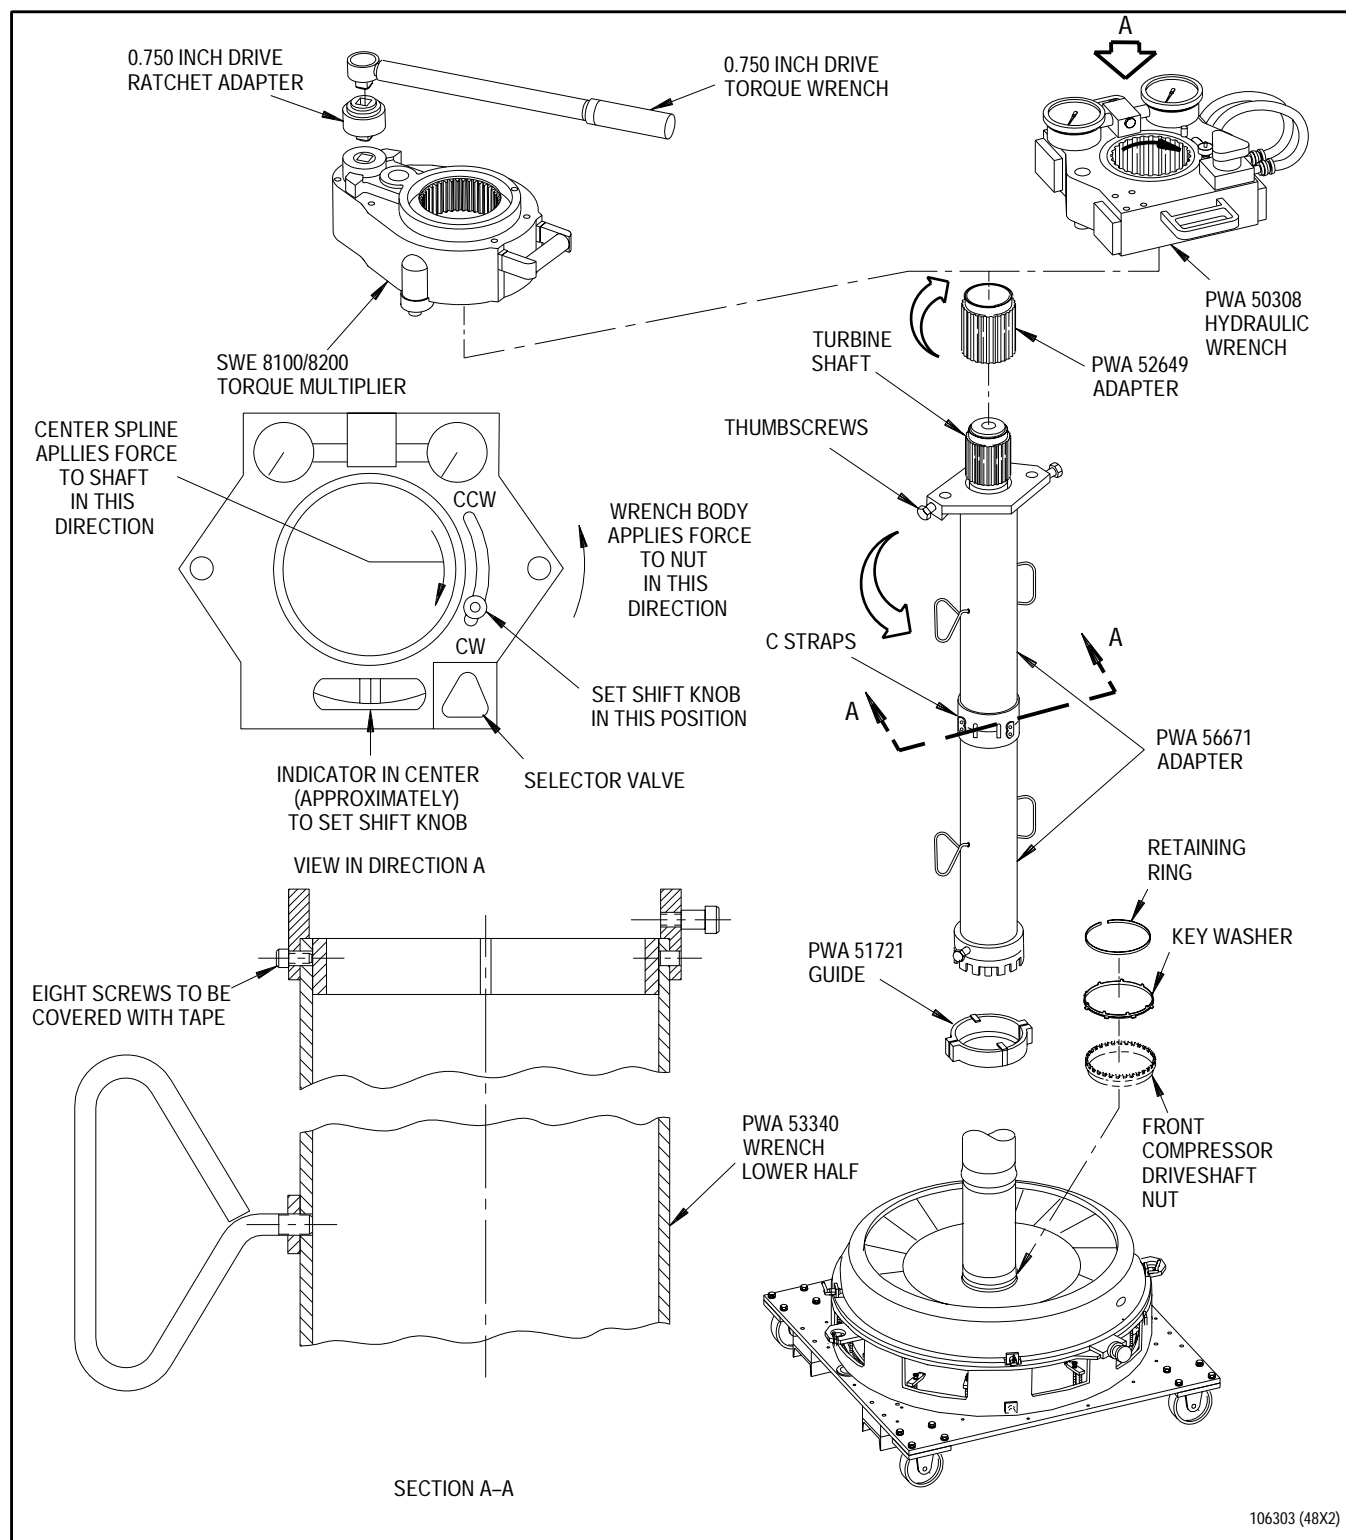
Fan Drive Turbine Module - Installation Into Vertical Build Stand (Sheet 3 of 9)
